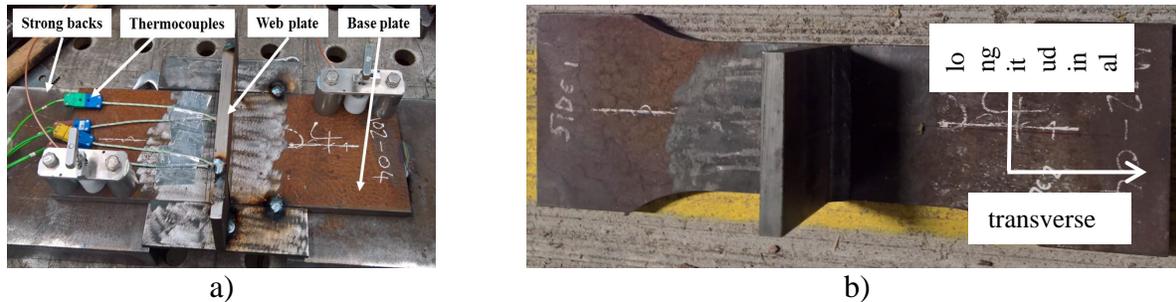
a) Welding set-up b) Cyclic load specimen after EDM cutting
